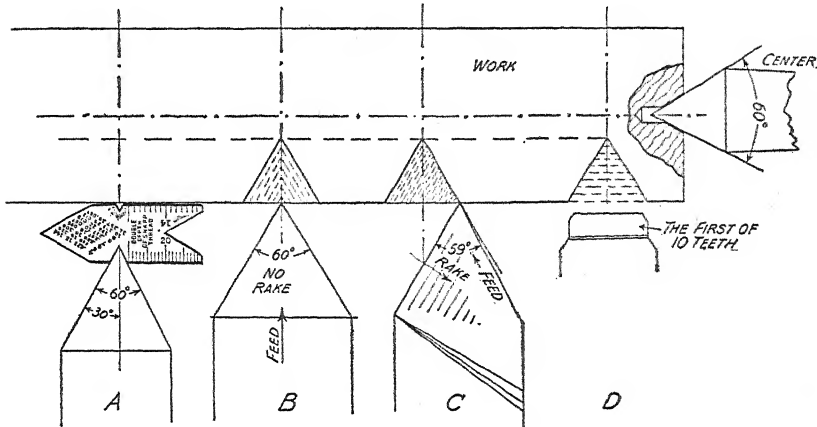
Methods Used in Cutting Threads on a Lathe with a Single-Point Tool.
